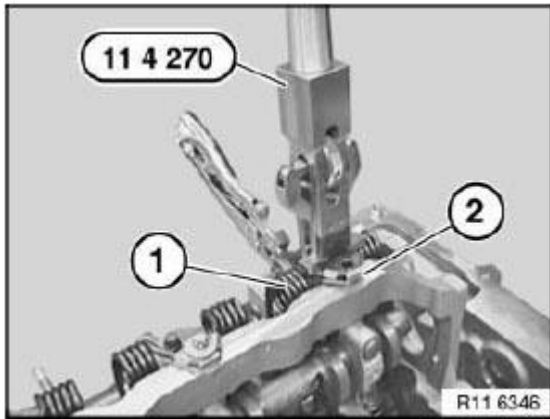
Identifying Torsion Spring And Lug With Special Tool (11 4 270)
